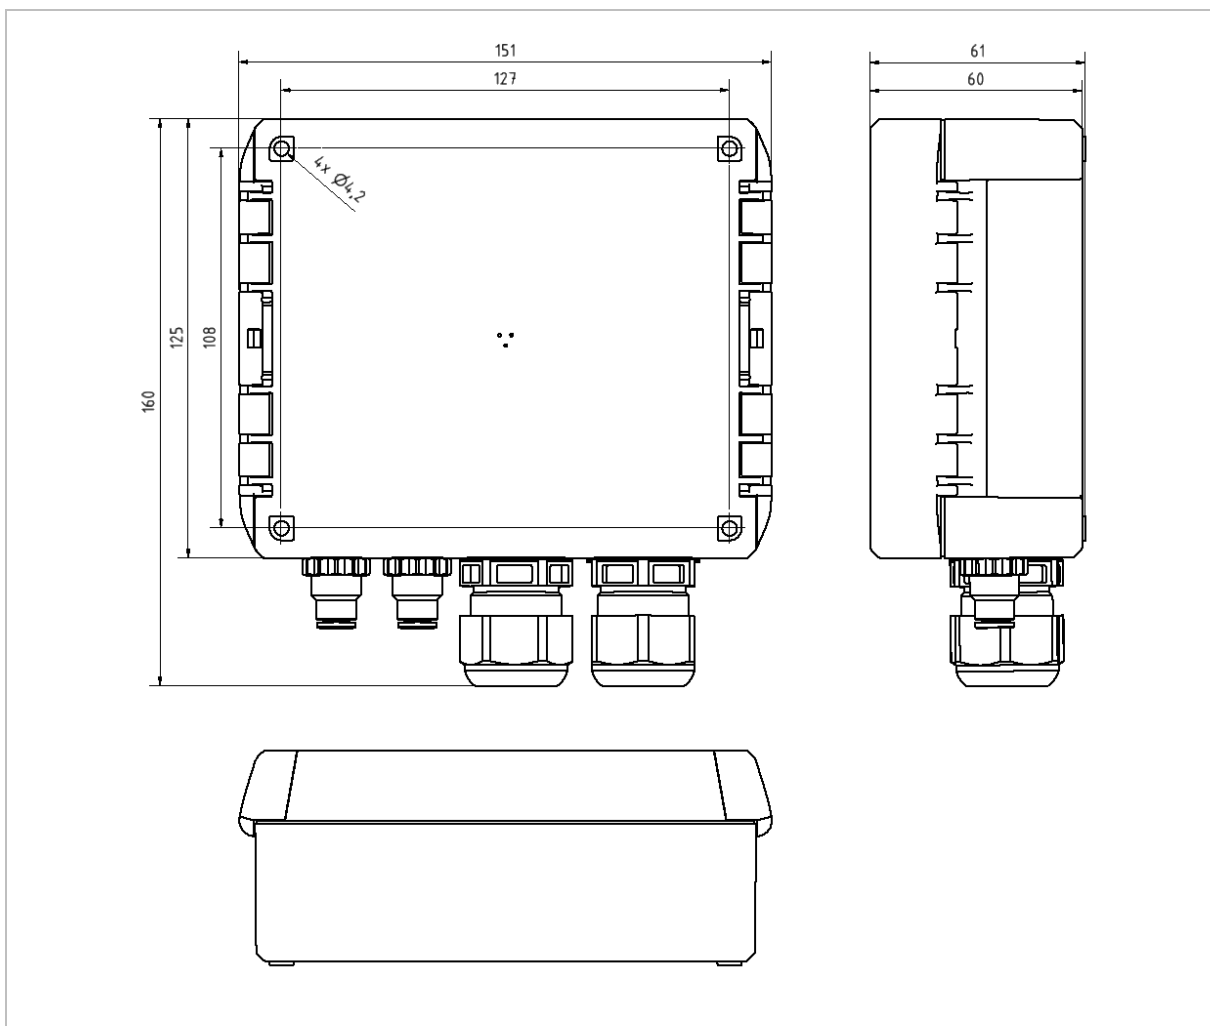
Dimensions HE 5422 (polycarbonate housing)
